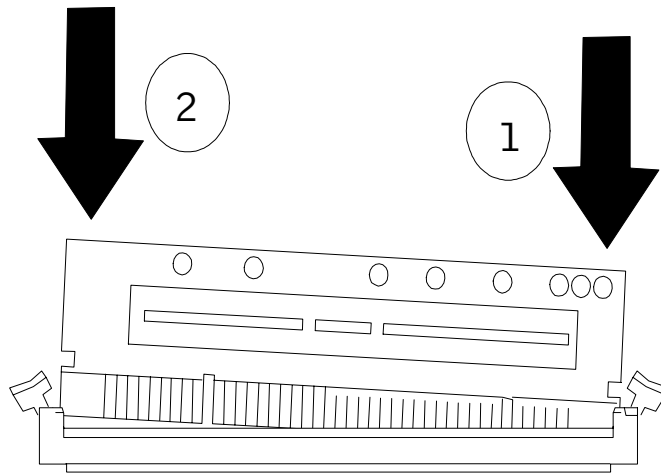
Inserting the Option Board into the PCI Riser Card Connector
